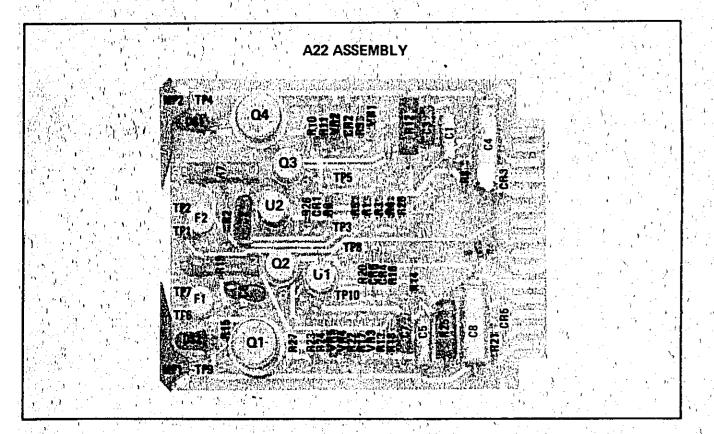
A22 +20V and -20V Regulator Assembly Component Locations
